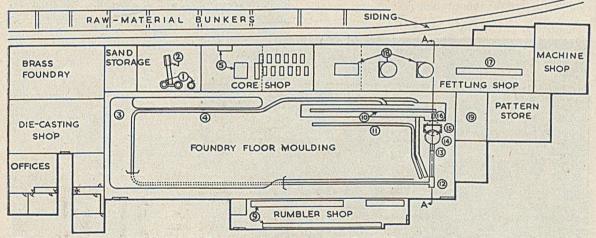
Plan View of Suffolk Iron Foundry, showing the Main Disposition of Ancillary Sections and the Layout of Important Plant. Key to the numbered Items (see also Figs. 8 and 10):
